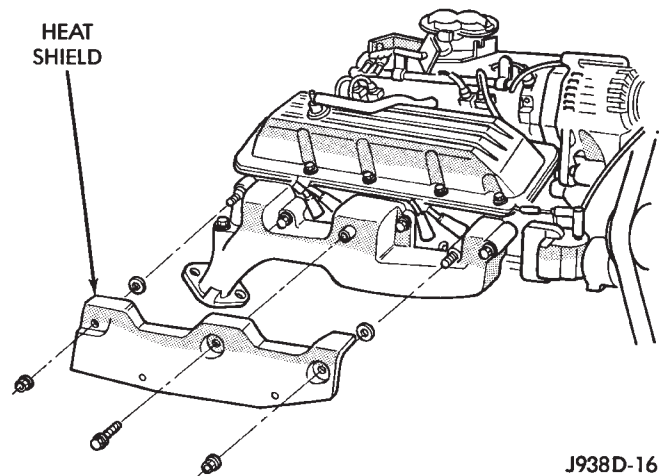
Exhaust Manifold Heat Shield—5.2L Engine
